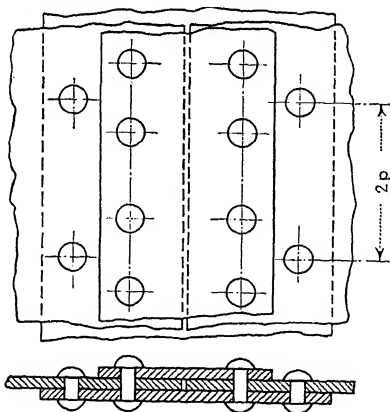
Multiple-riveted butt joint, with two rows of rivets.
